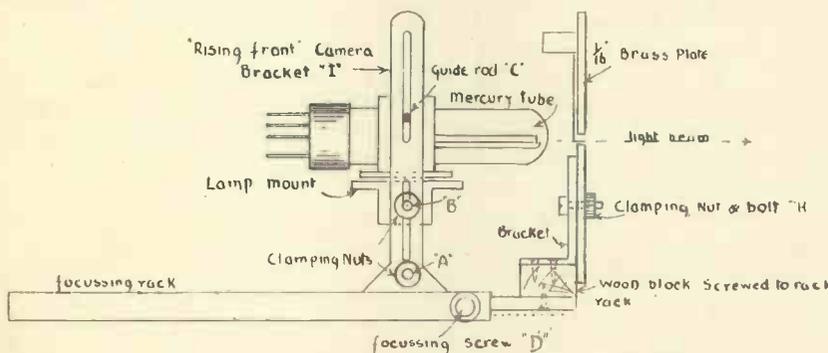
A side elevation of the holder and mask showing details of construction.
